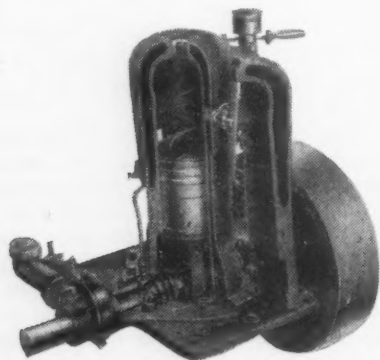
Single Cylinder Ferro Engine with a Quarter Section Removed.
